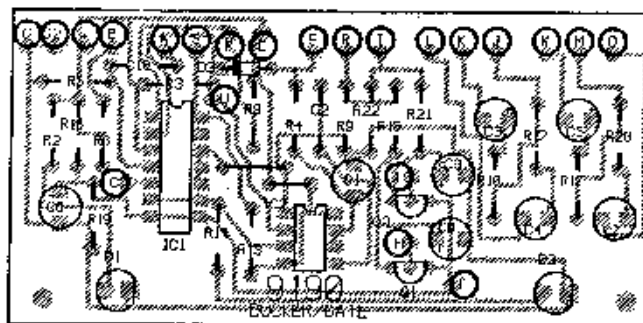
This parts placement drawing with phantom circuit board conductors may be useful if you have to trace out the circuit.
